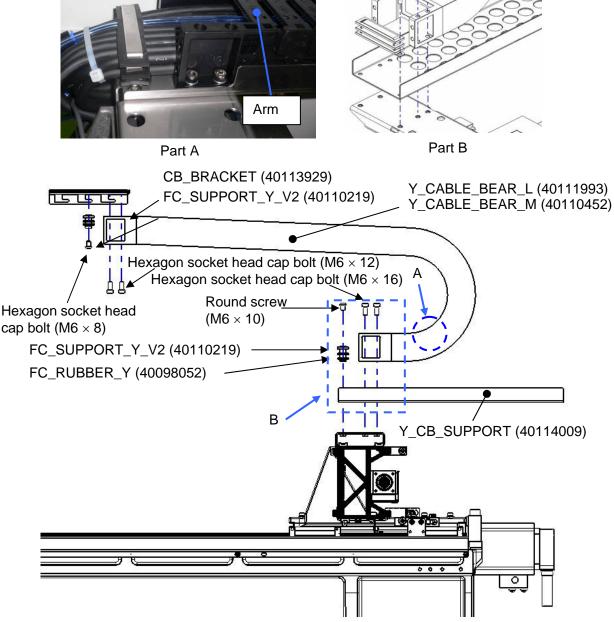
Y-Axis Cableveyor (M and L Board Specifications)
